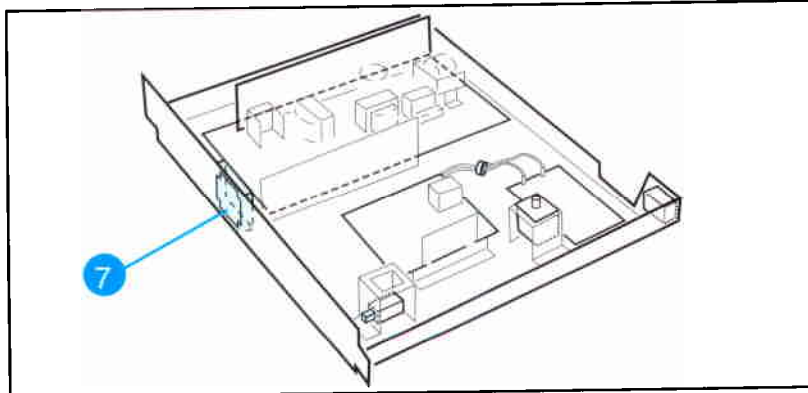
DC Power Supply Fan (HP Color LaserJet printer only)
